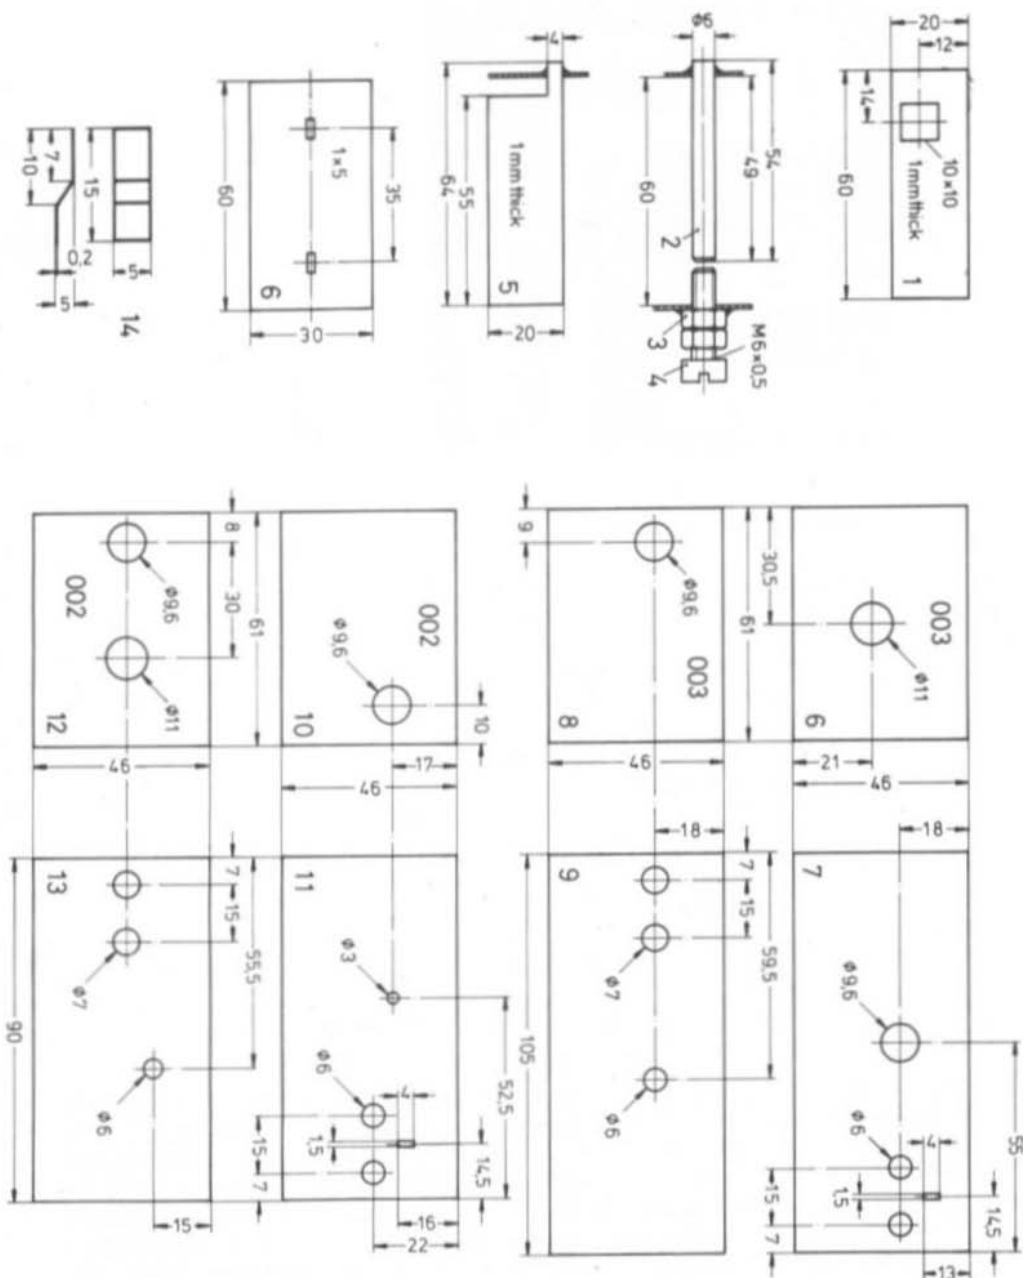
Metal pieces for modules DC 8 UG 002 and 003
